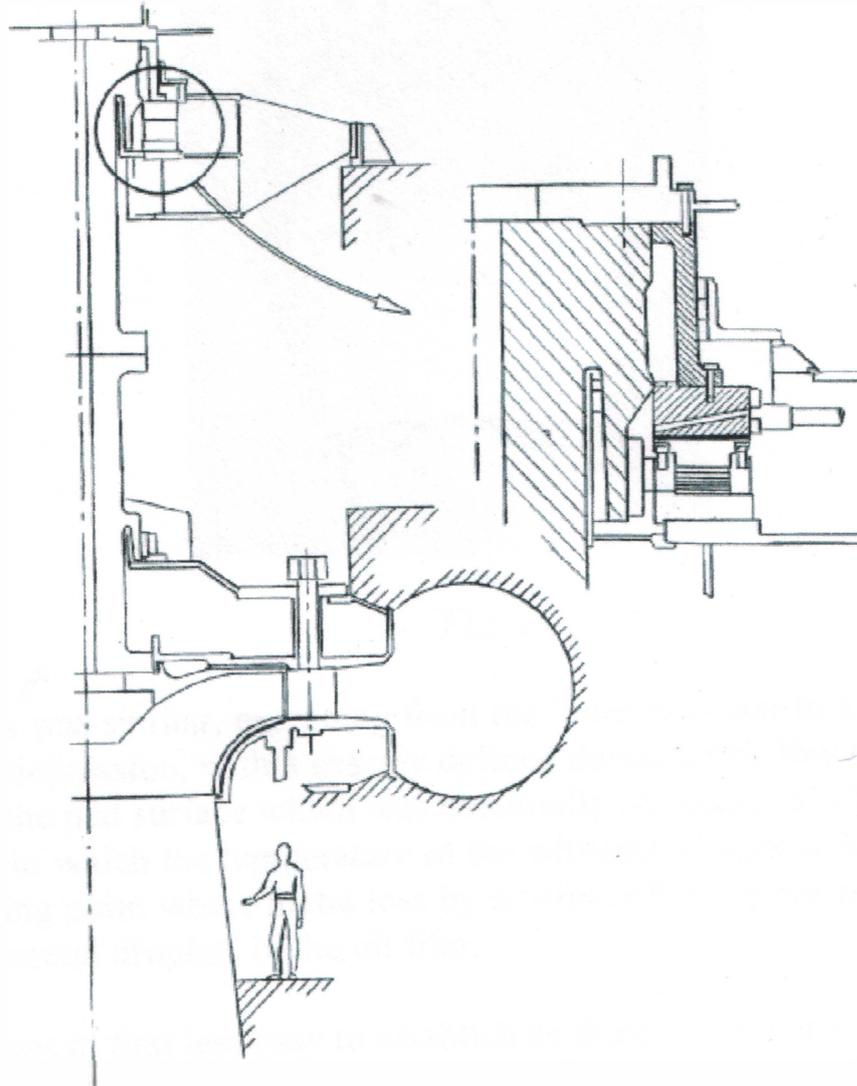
Cross section through the pump turbine with reference to the thrust and guide bearing
